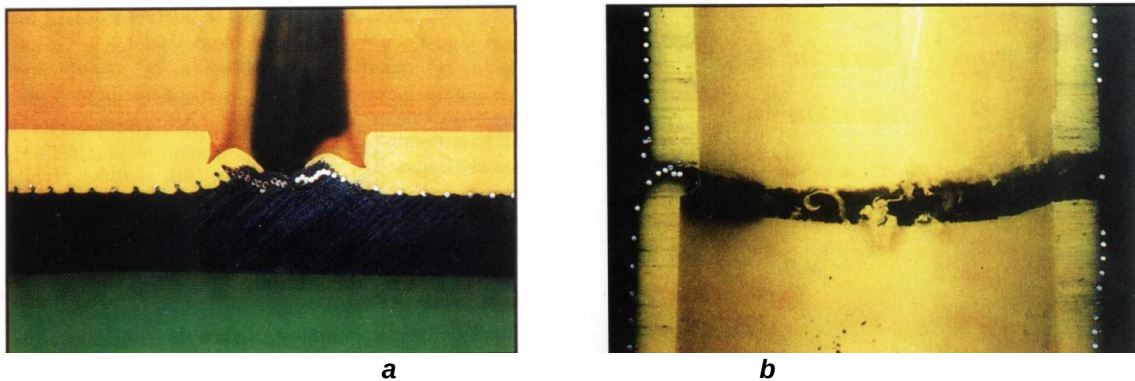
Defaults at electro-fusion welding: a – insufficient penetration depth; b – wrong welding.
